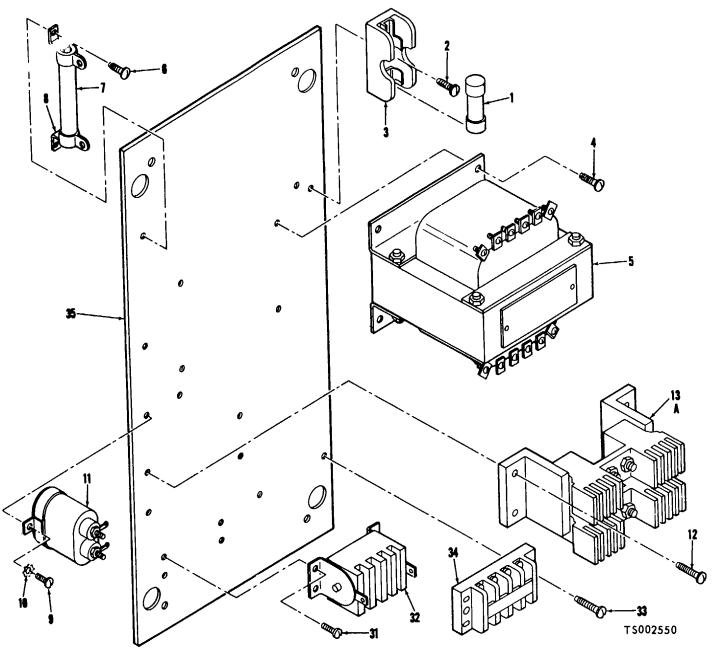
VSX Exciter Panel Assembly, (Sheet 1 of 2)
